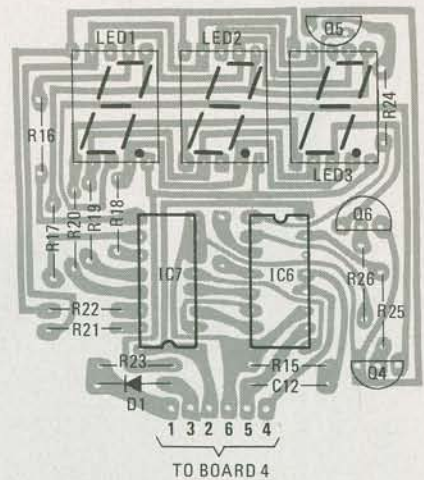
PARTS-PLACEMENT DIAGRAM for board 5 is shown here.
